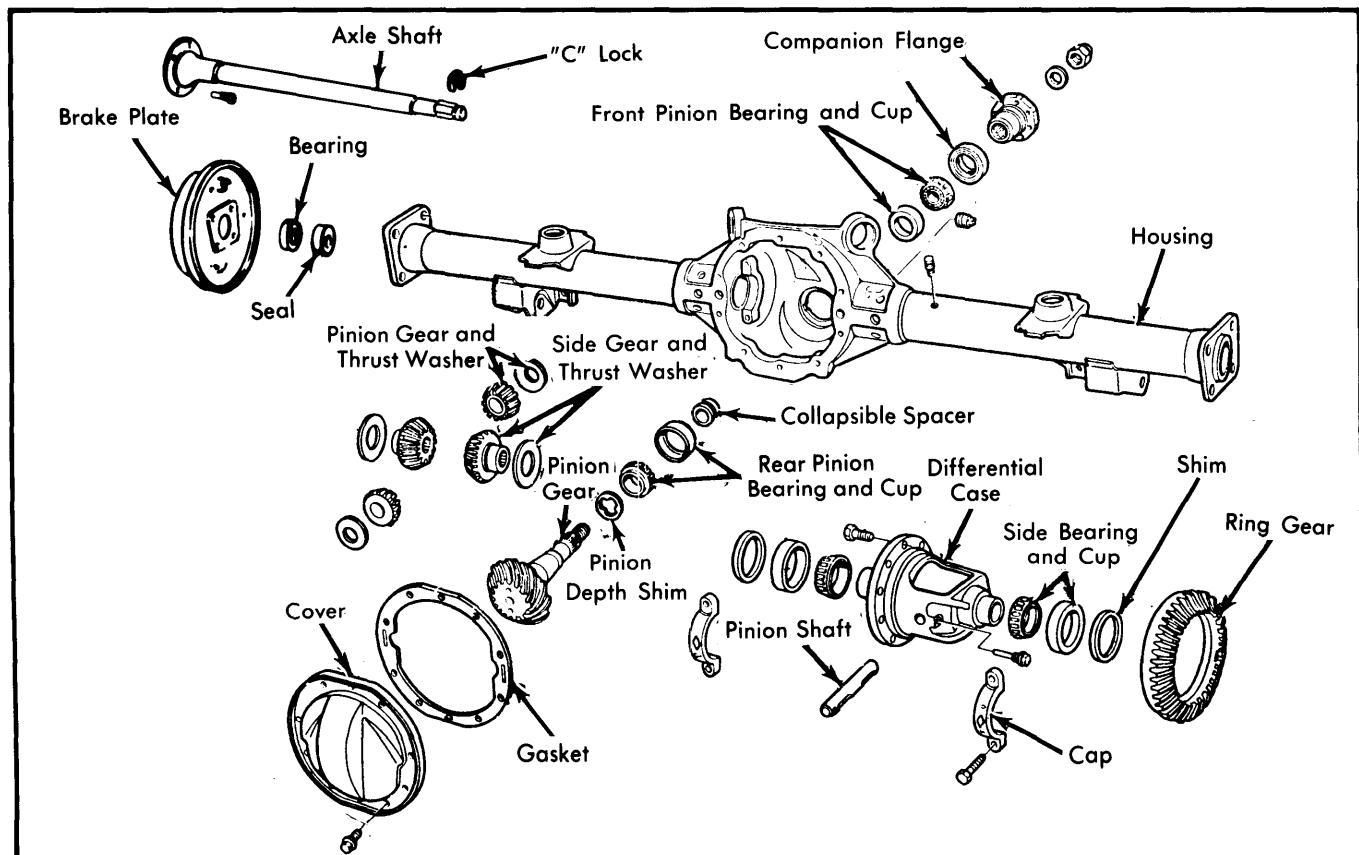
Exploded View of General Motors Integral Rear Axle Assembly (Exc. Corvette)
